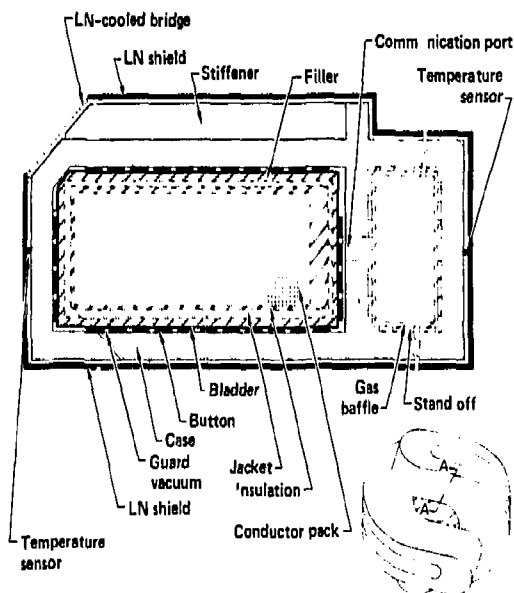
Sectional ("A-A") view of the magnet showing its construction and thermal shields.
